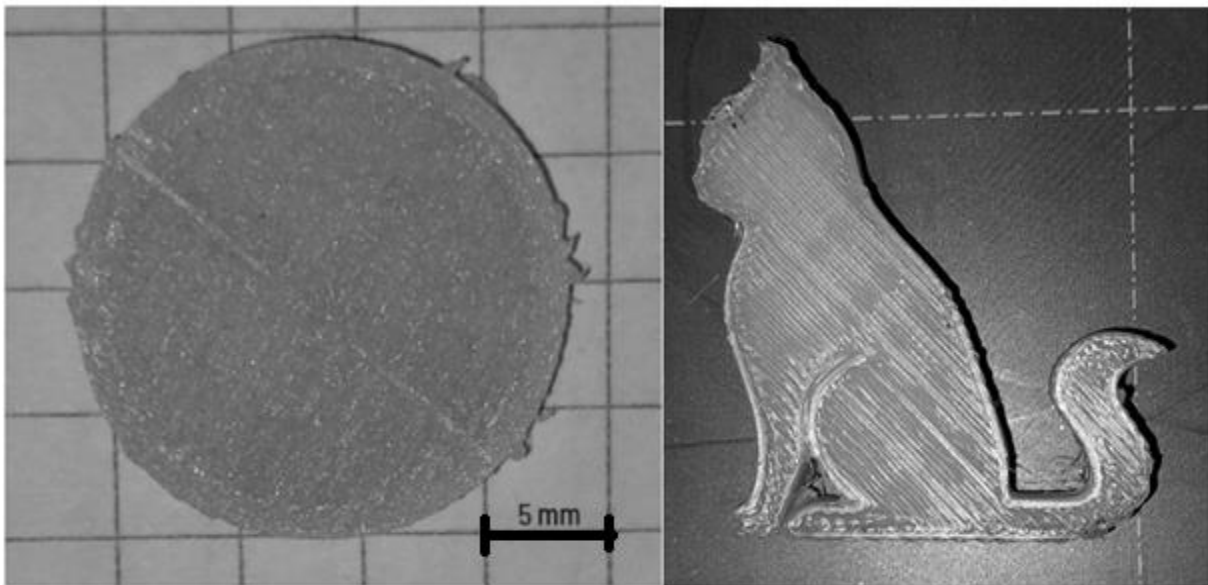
Macrograph of exemplary FDM 3D printed HDPE parts
